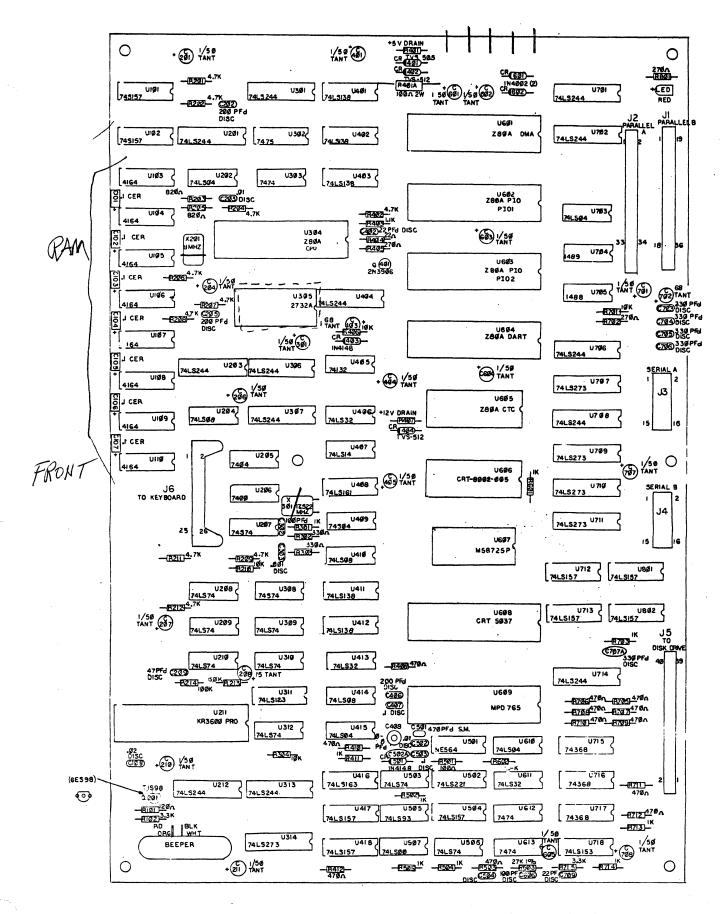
MAIN BOARD COMPONENT LAYOUT
